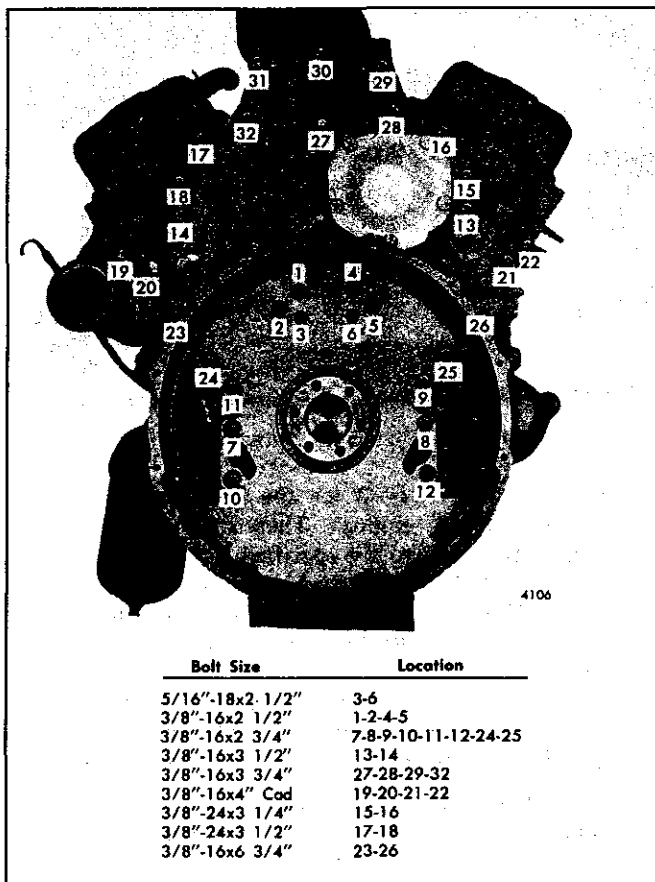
Flywheel Housing Bolt Sizes and Tightening Sequence (Operation 1)—8V Engine
